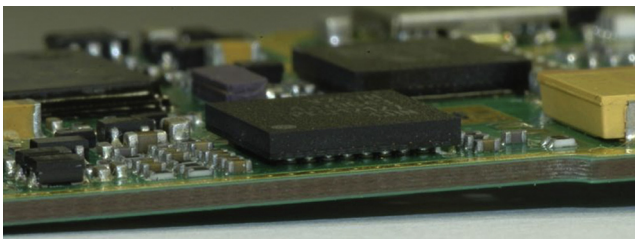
Ball grid array packages on the board assembly of a mobile device.
